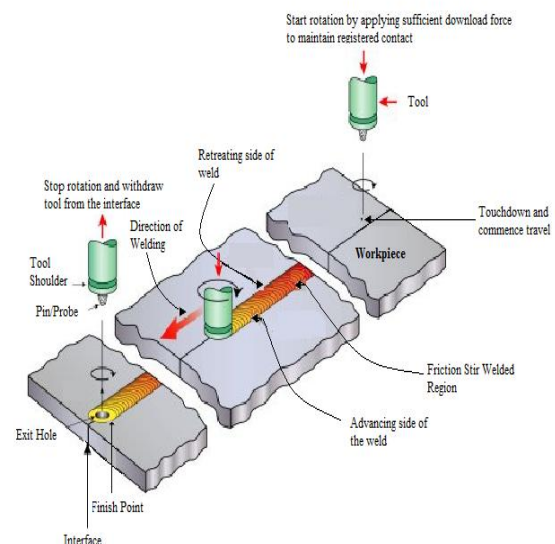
Systematic Drawing and Process Principle of Friction Stir Welding
